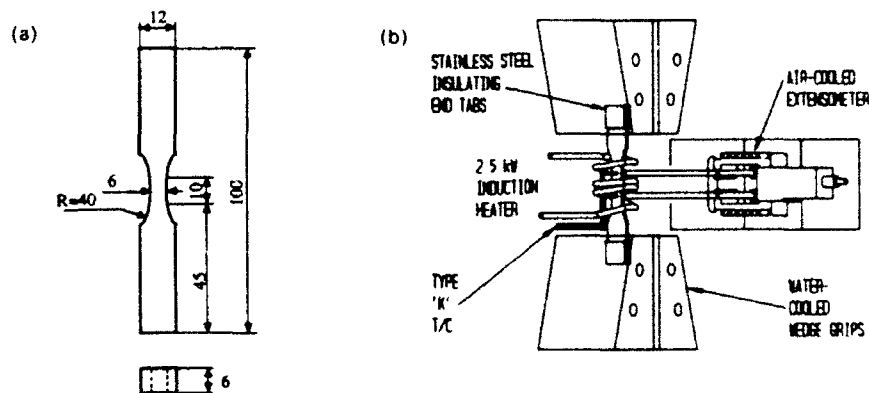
(a) Specimen geometry. (b) Experimental setup.
